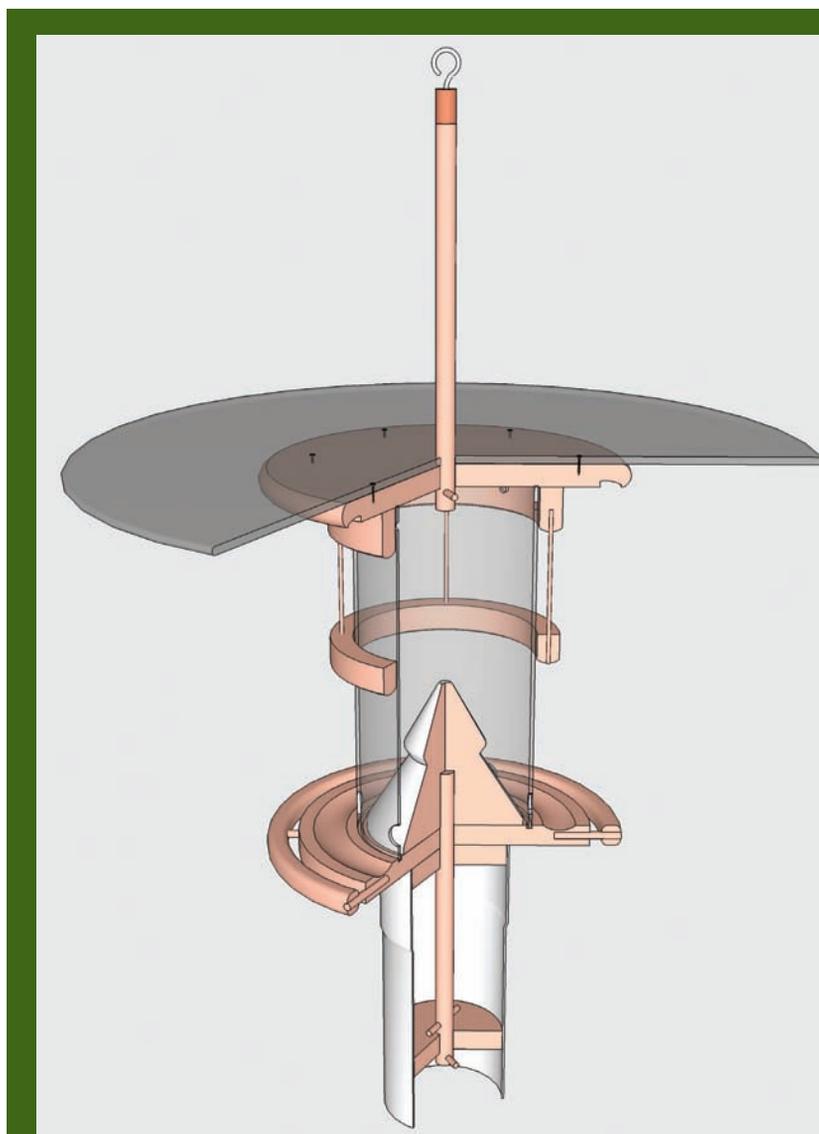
This cutaway shows how the parts are shaped and assembled. The large hawk guard on the top is optional.
